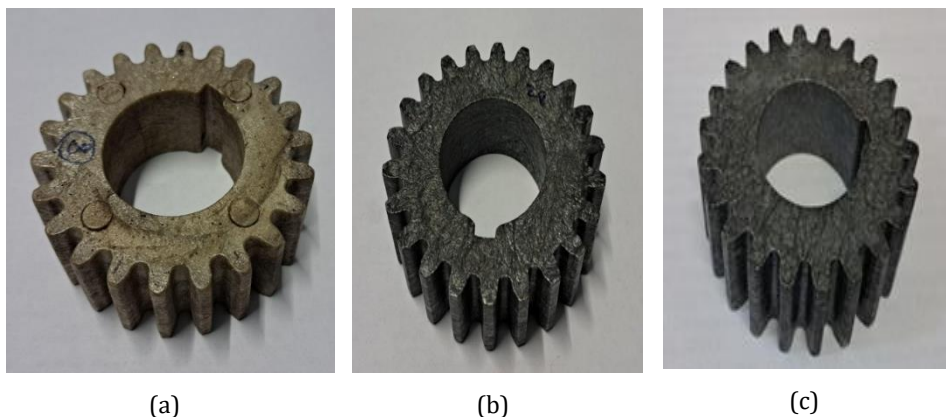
Gear images (a) PAEK gear, (b) PAEK+ MWCNT gear, (c) PAEK +Amine functionalized MWCNT gear
